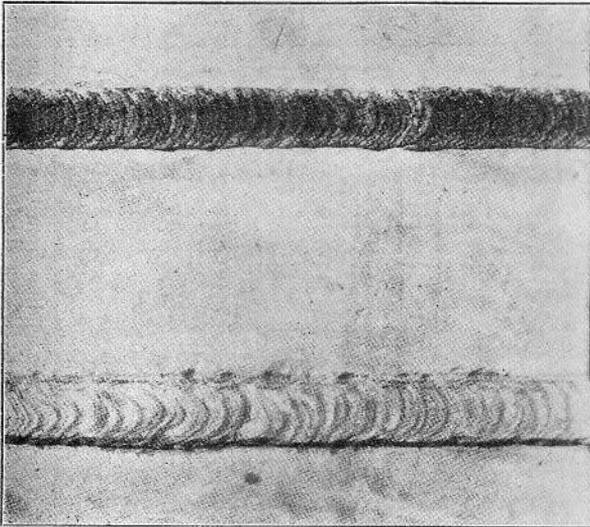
The Bare Rod Weld (Above) has been eaten away after being submerged in Acid Solution, while there is Little Change in the Coated Rod Weld (Below).
